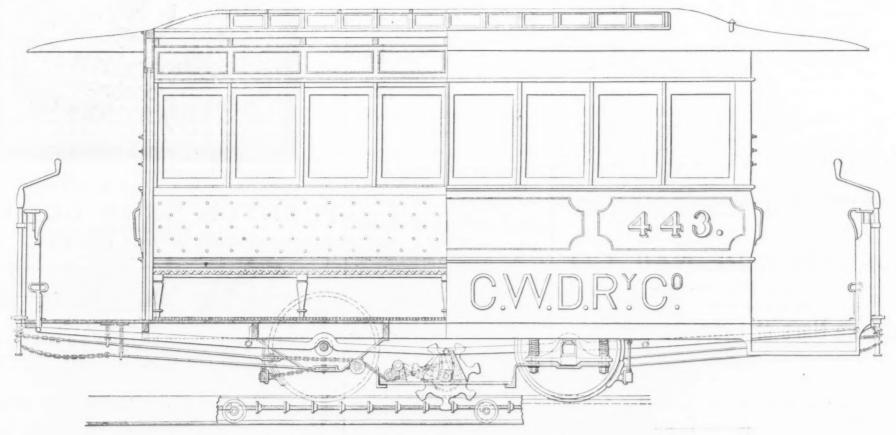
Side Elevation of Car, Showing Sprocket and Cable
